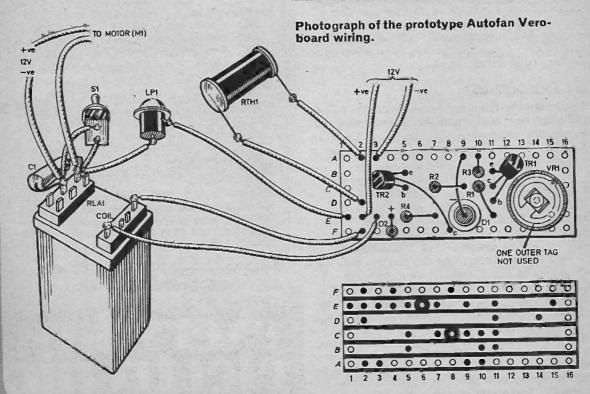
Complete layout and wiring of the Autofan unit. RTH1 is mounted on the engine.
